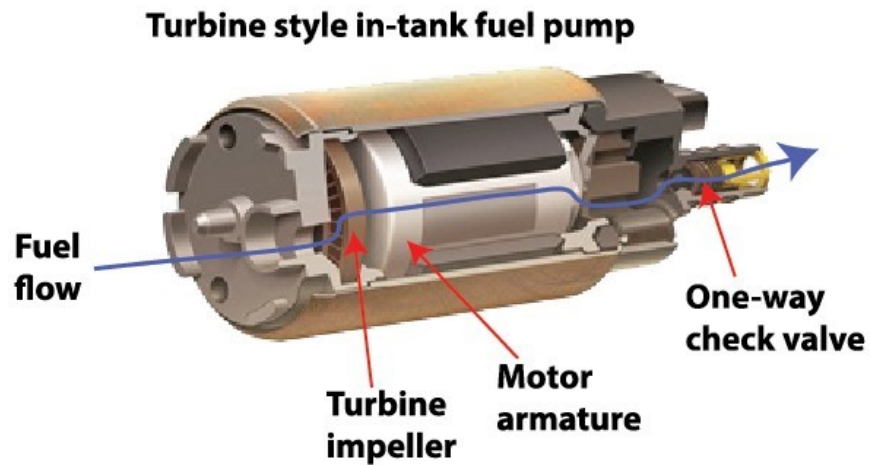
Fuel Pump Assembly Diagram.⁴¹
